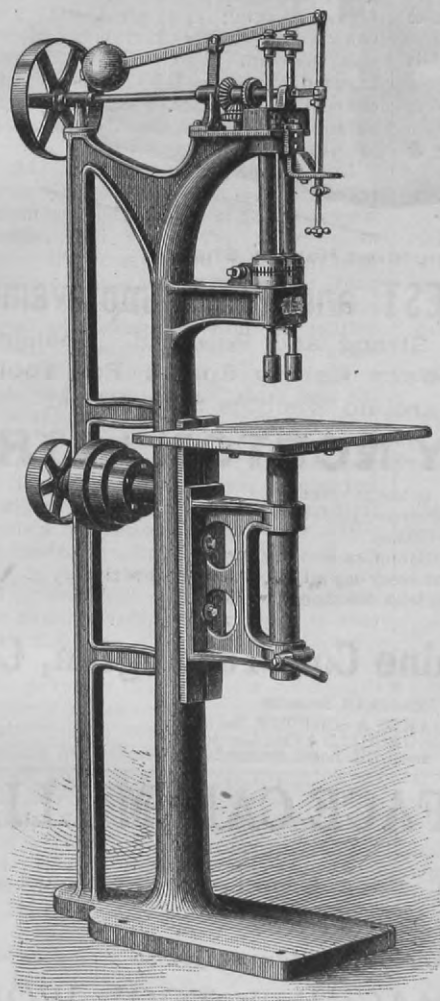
Light Adjustable Two-Spindle Tapping Machine.
